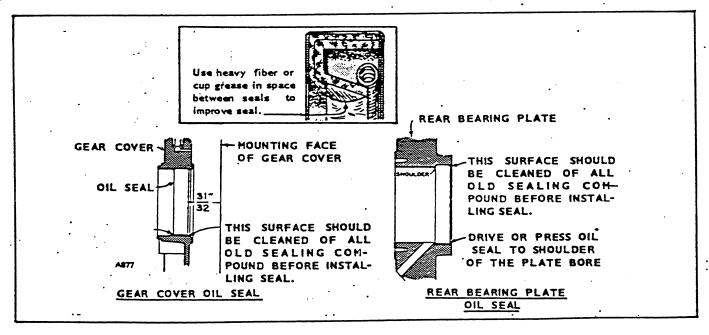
GEAR COVER AND REAR BEARING PLATE OIL SEALS
